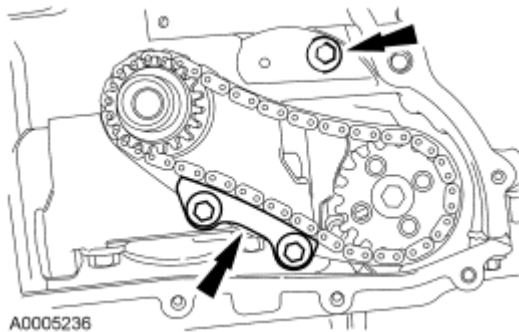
Installing Oil Pump Drive Chain Guide And Shoulder Bolts
